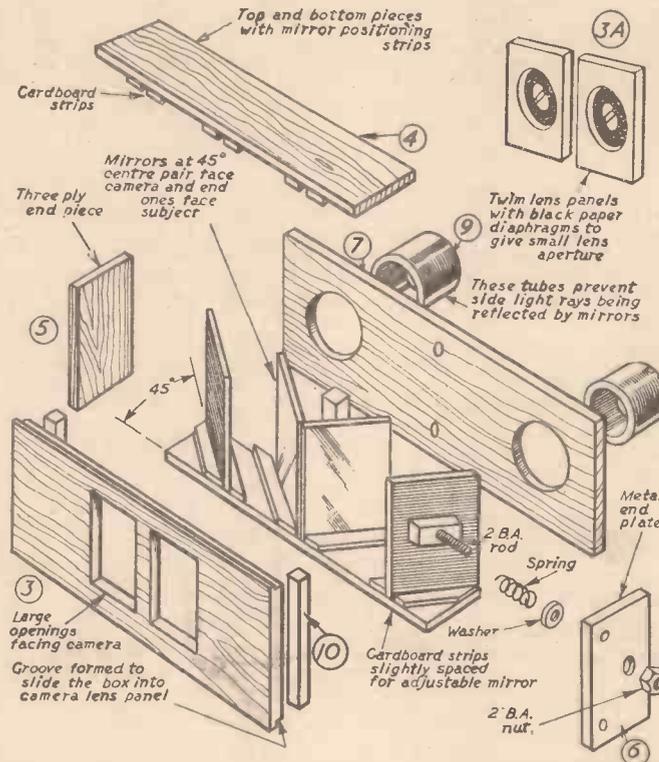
Exploded view of the adaptor, showing the various parts in order of assembly.
